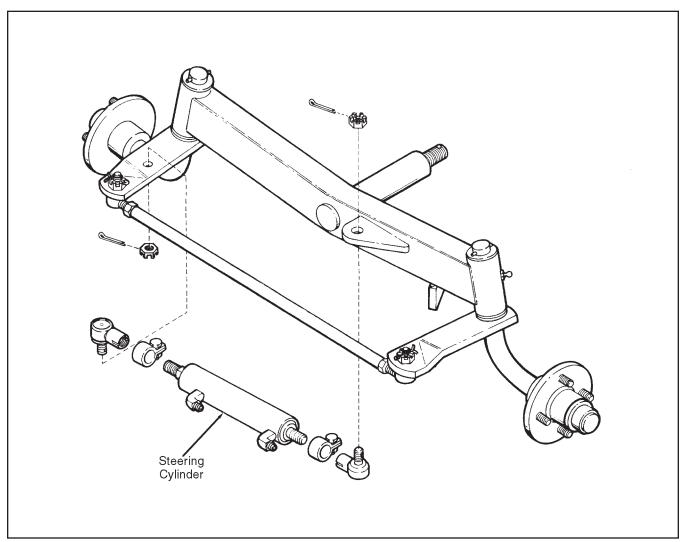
E-1. 2 Wheel Drive Steering Cylinder Removal/Installation
